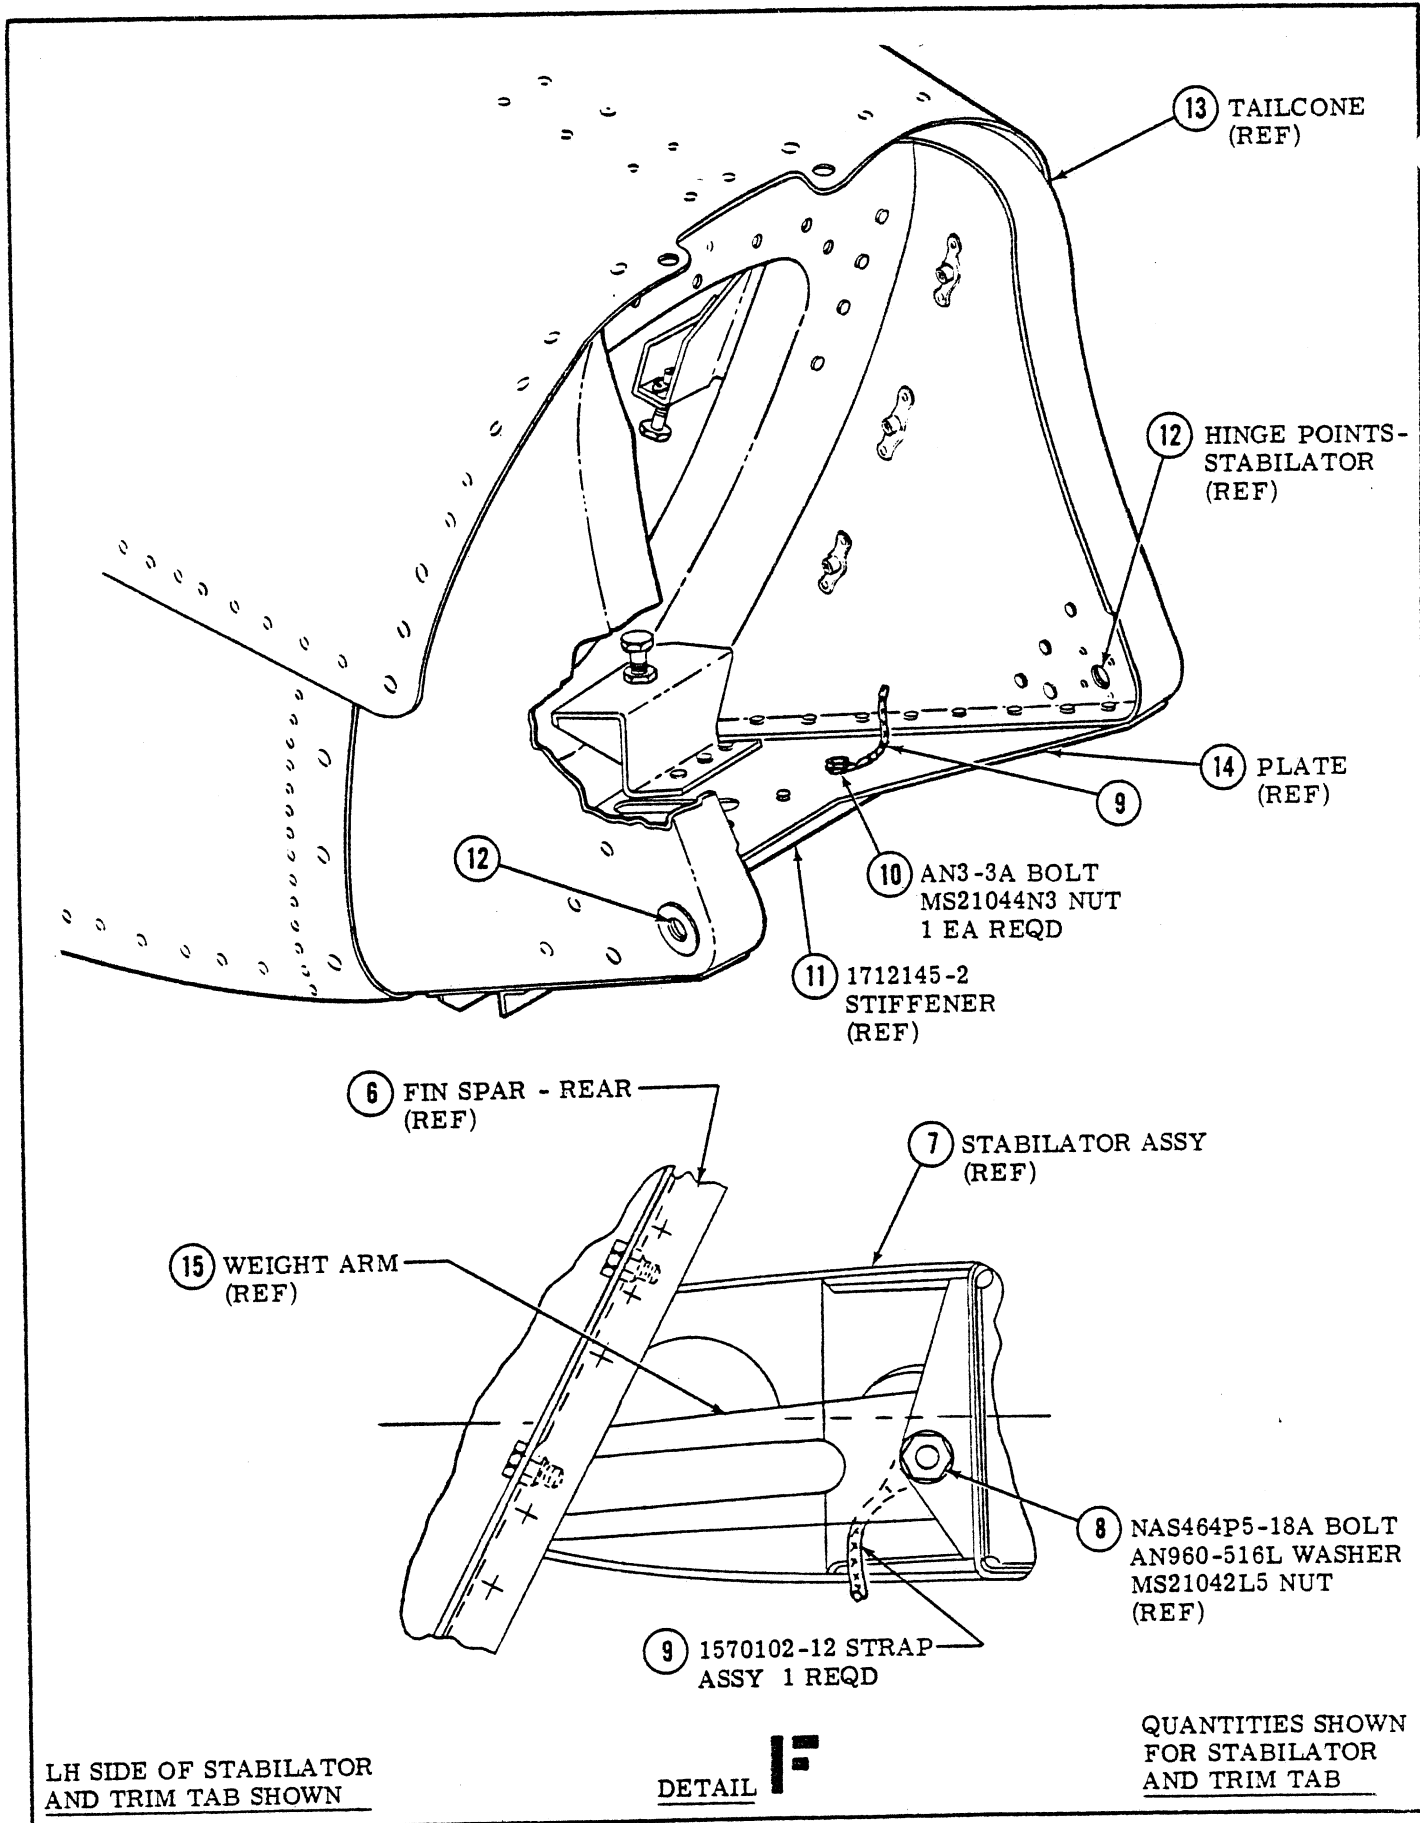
Wick and Strap Installation. (Stabilator) (sheet 2 of 2)
